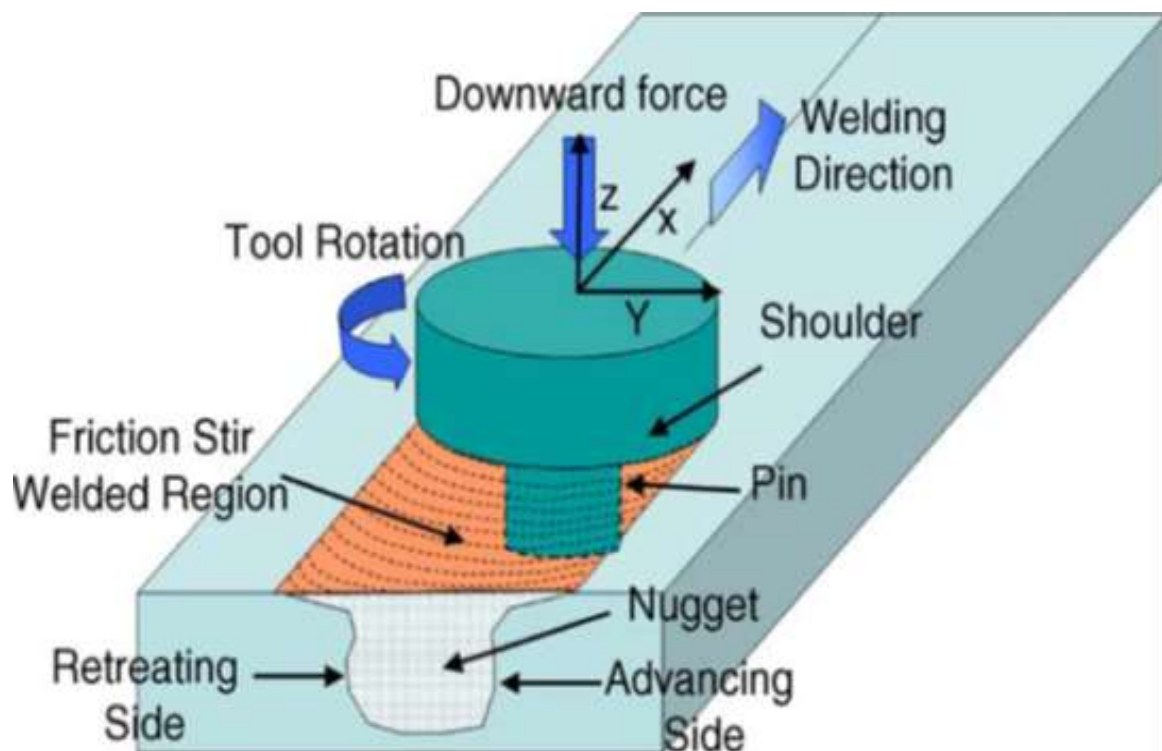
Schematic drawing of friction stir welding [Mishra and Ma, 2005]
